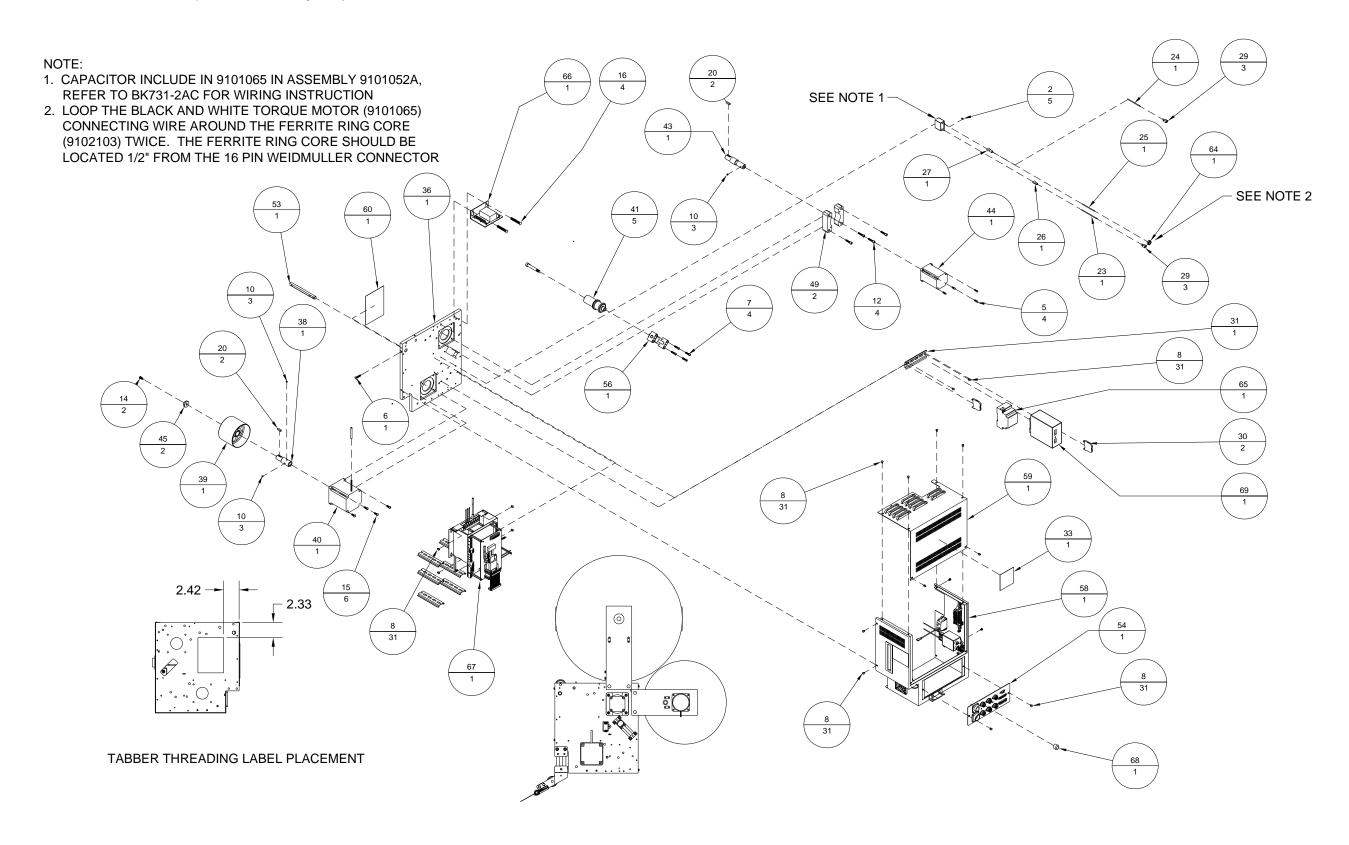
Tabber Head Assembly, Version 2 Page 2 of 2 (BK731A-2)
